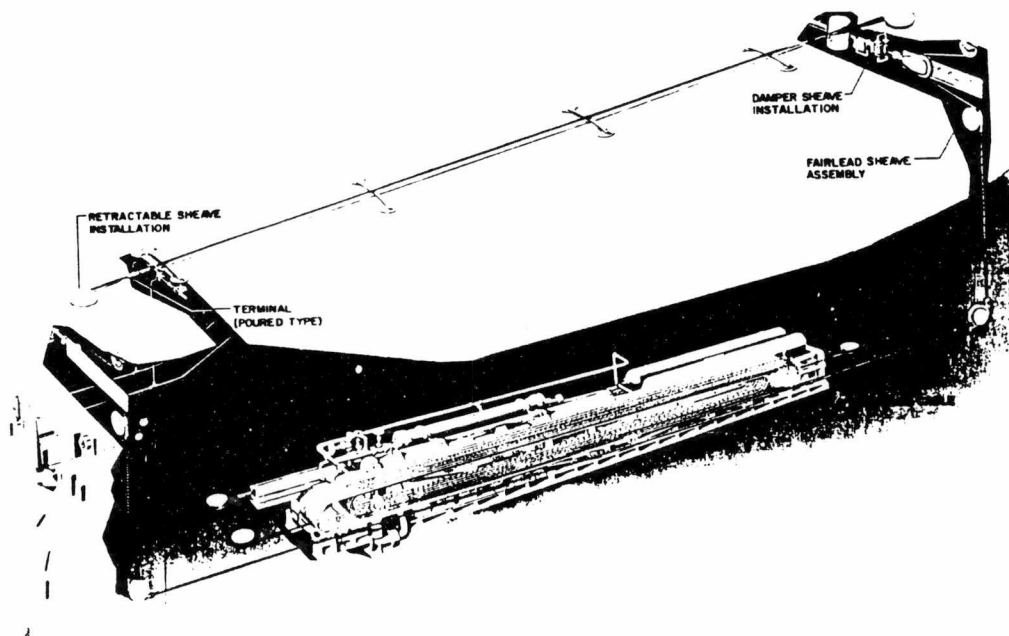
General Arrangement Drawing of Shipboard Arresting Gear
